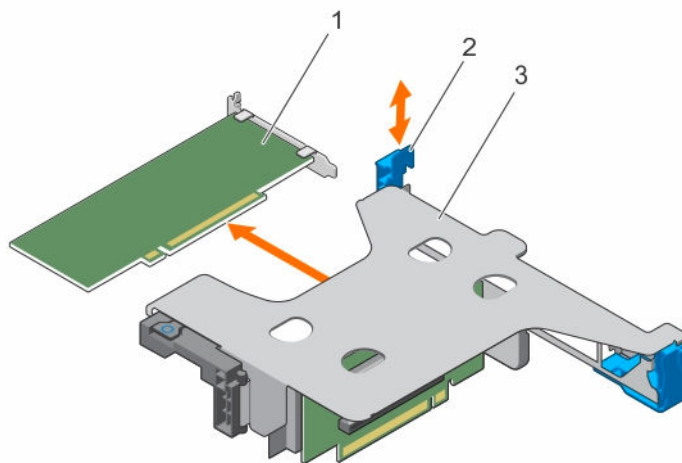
Removing and installing a low profile expansion card from the dual riser module
